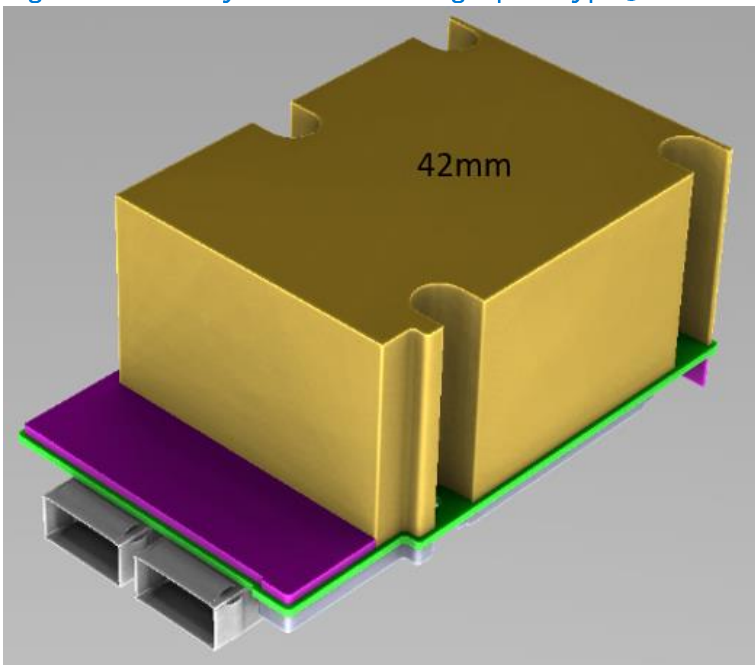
Secondary Side View of Single port Type 5 Mezzanine card
